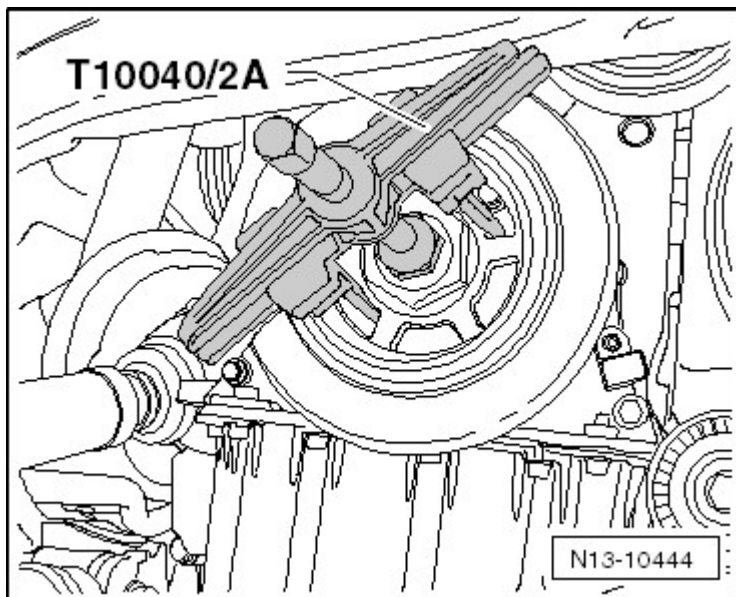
Identifying Vibration Damper With Two Arm Puller, Removal/Installation
